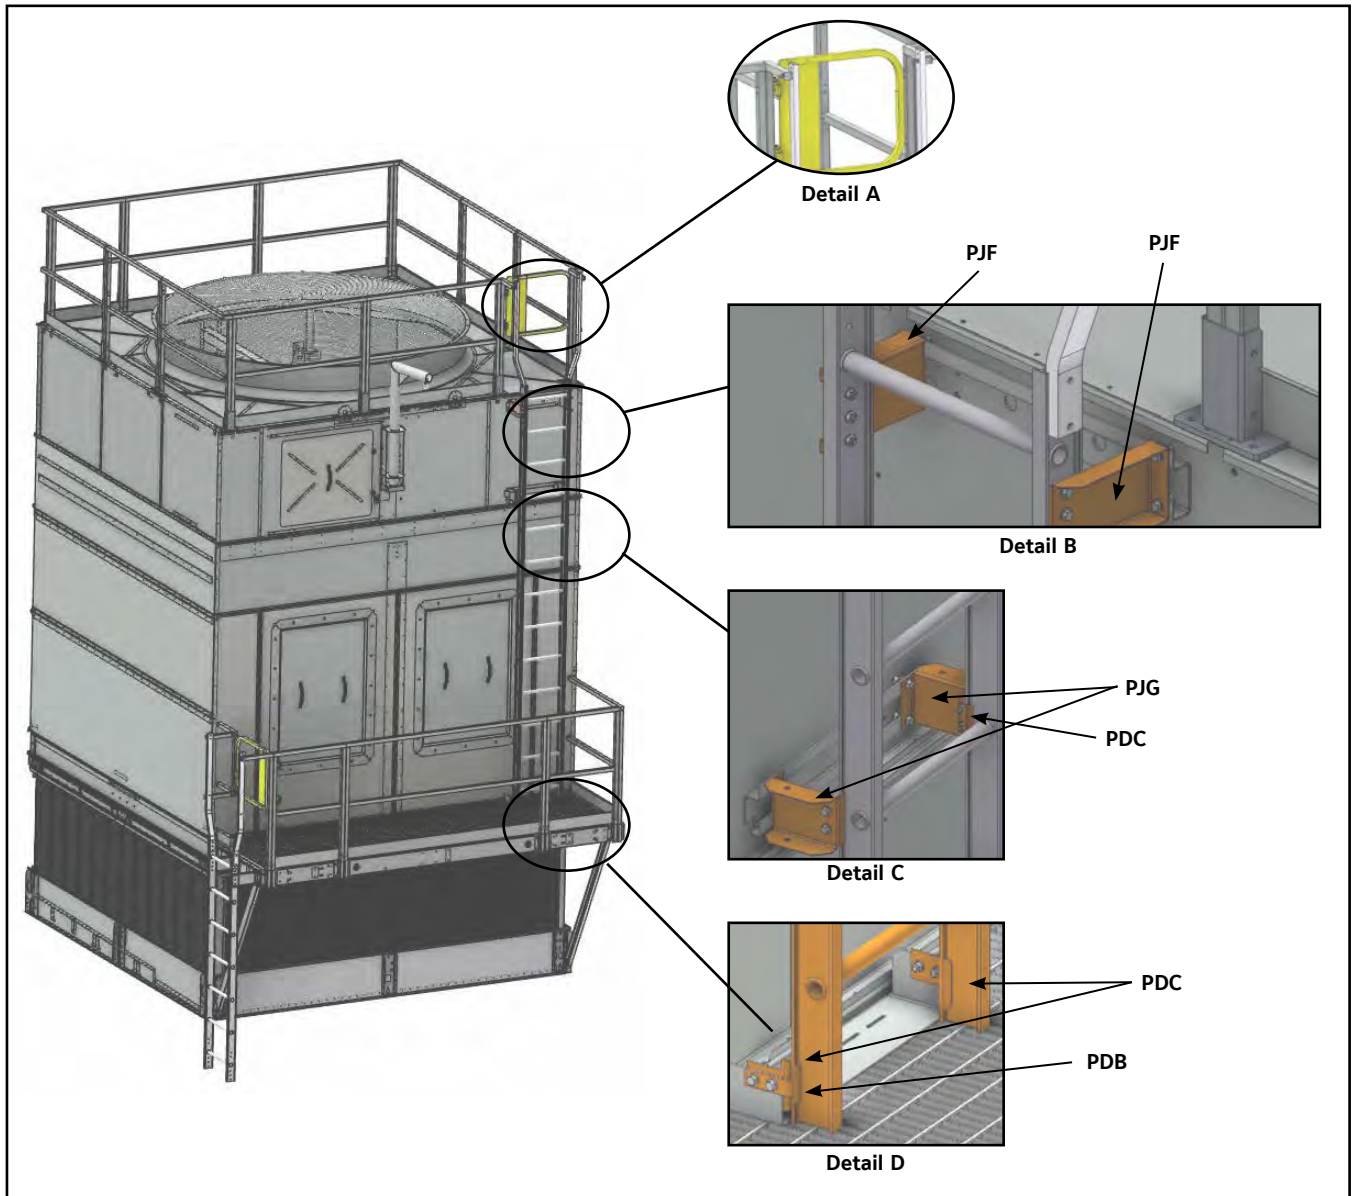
Top Perimeter Guardrail Ladder to Fill Platform-
